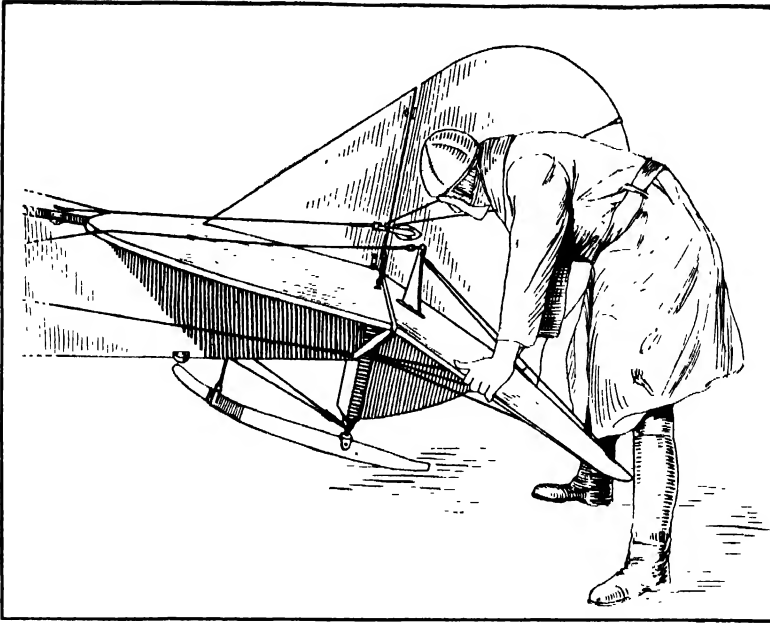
Testing Elevators and Attachment to Stabilizer.
